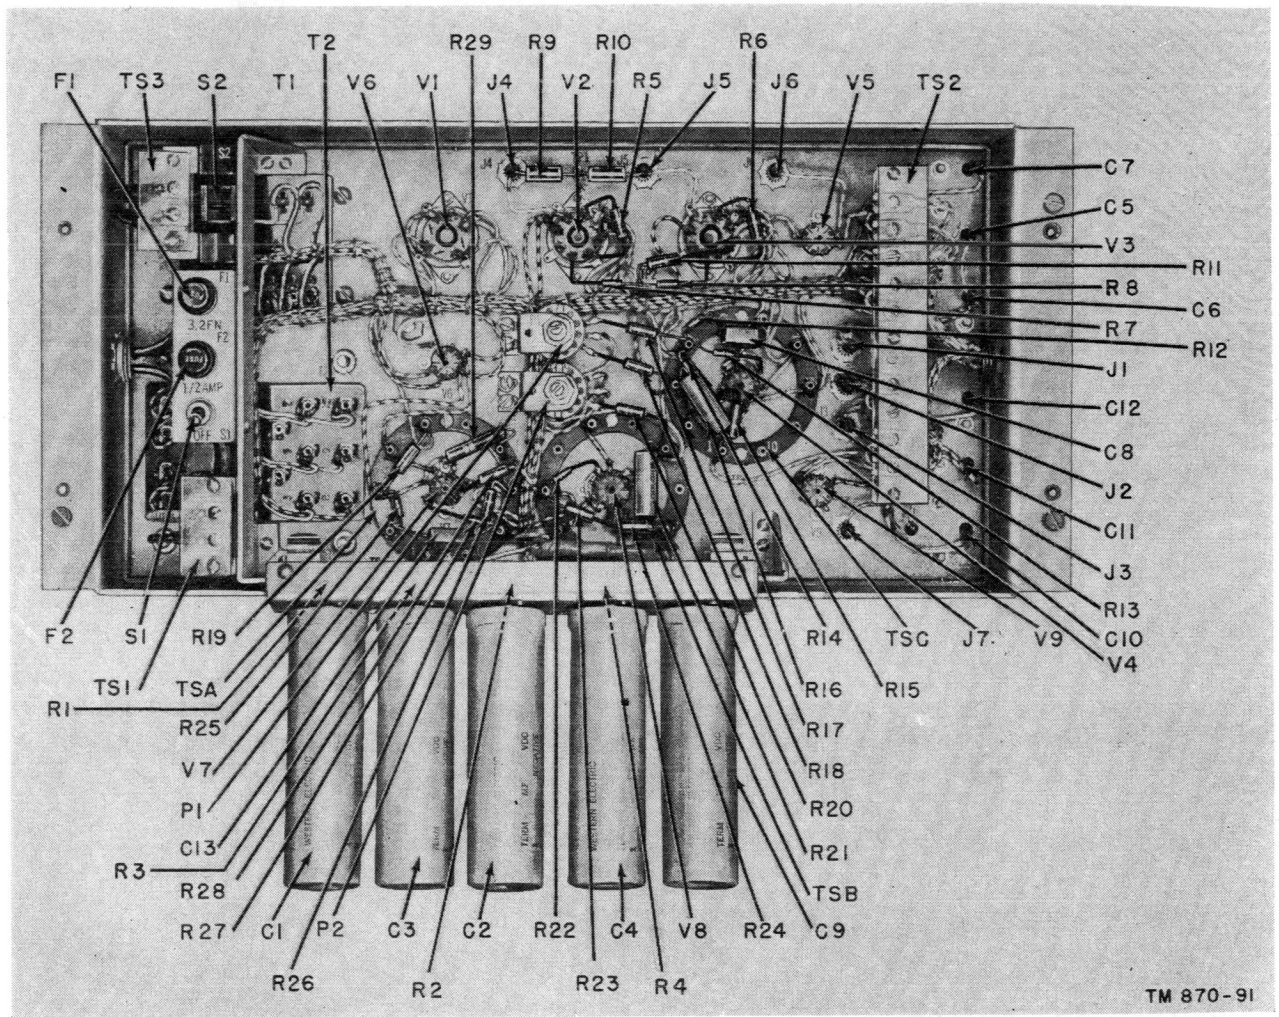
+130-volt rectifier panel 6, front view, component locations.
